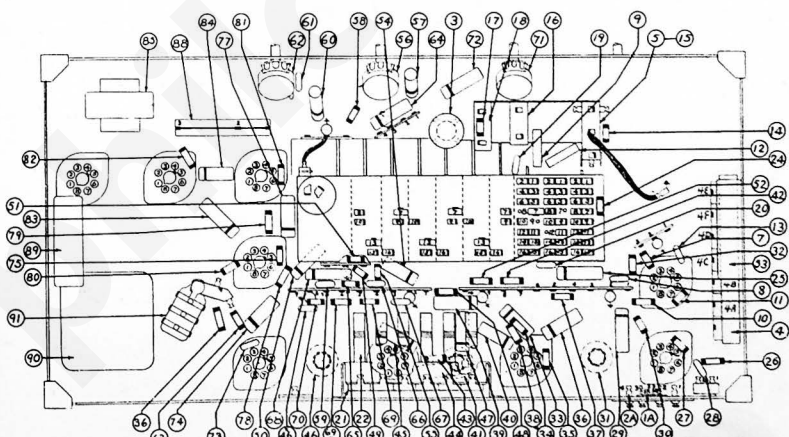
Locations of Parts—Under Chassis Model 42-395
